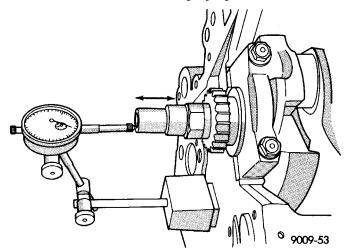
Checking Crankshaft End Play—Typical REMOVAL - CRANKSHAFT
